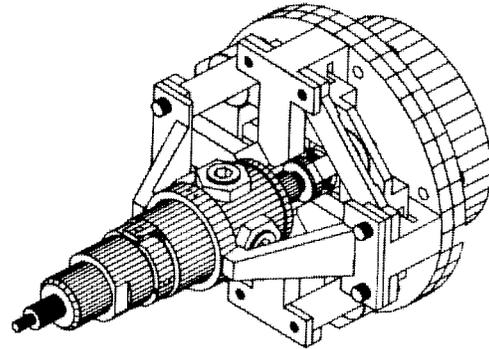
Chamfering and Deburring End-of-arm Tool (CADET)
